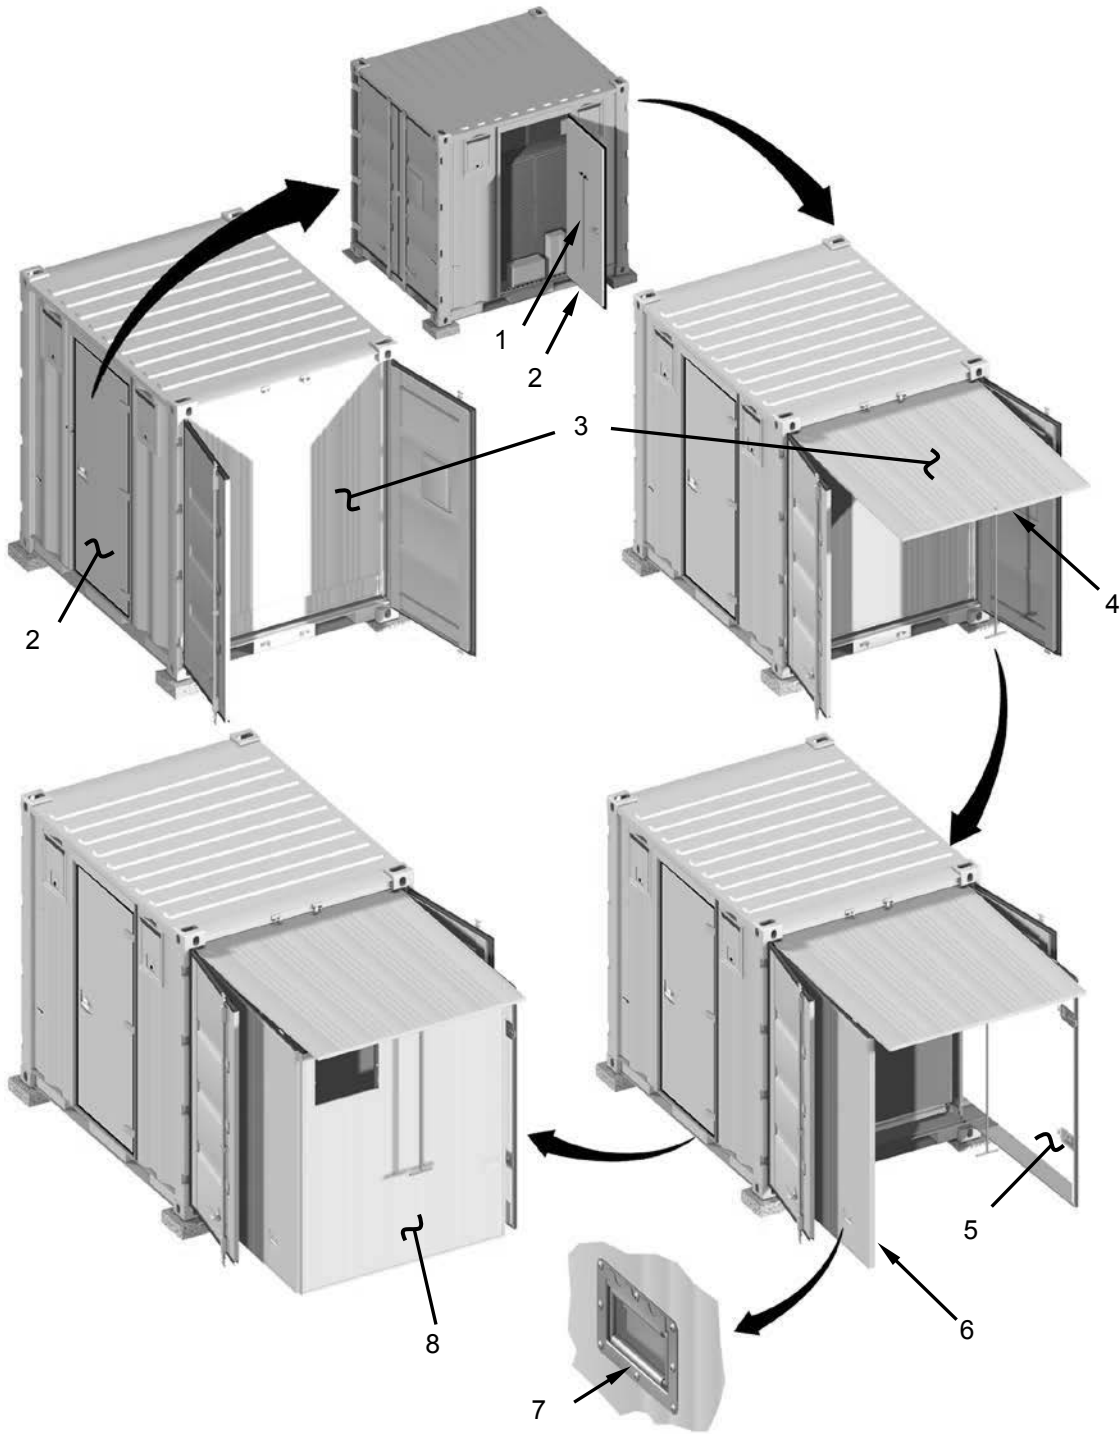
Unfolding Roof, Walls, and Floor (Sheet 1 of 2).
